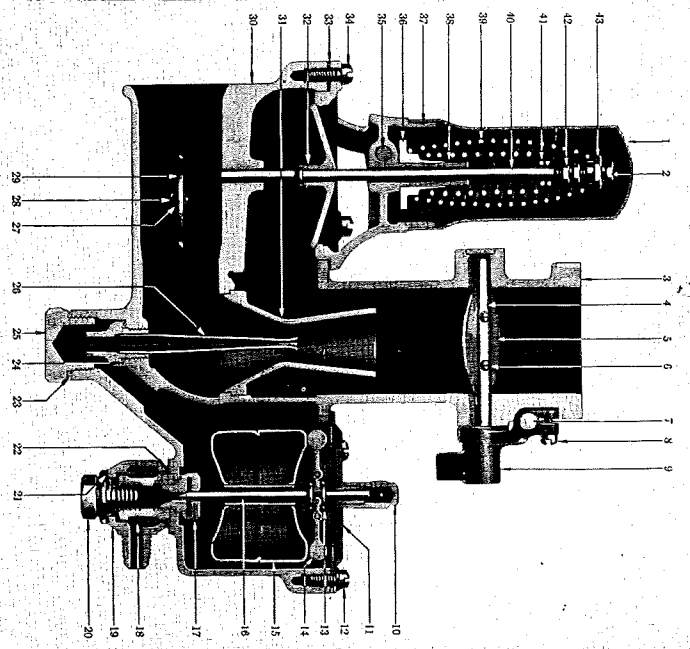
Sectional view of the Packard six carburetor, as used on model 426-433 (also applies to the eight, model 336-343).
